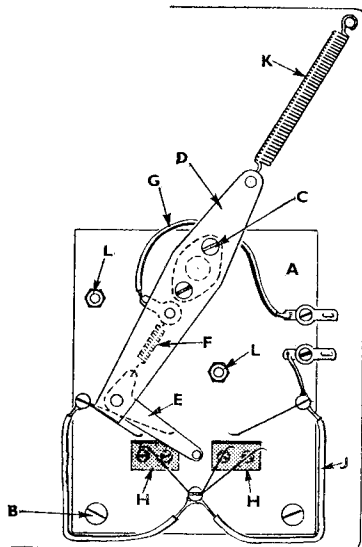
Steering control fitted inside control box. The Perspex panel is 3 in. high
